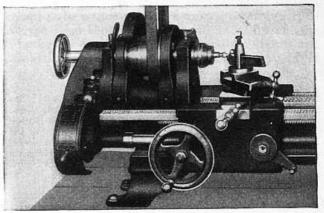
The 9-inch Junior Lathe Equipped with Hand Wheel Draw-in Chuck Attachment
